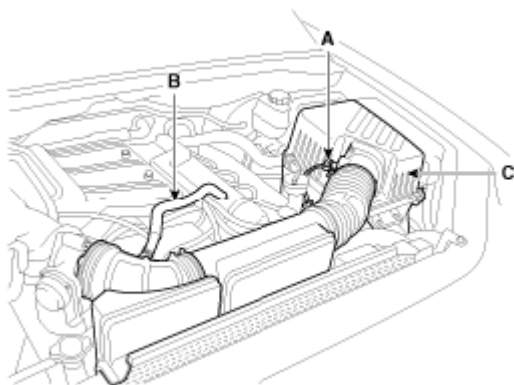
Identifying Air Cleaner Assembly, AFS Connector, & Breather Hose
